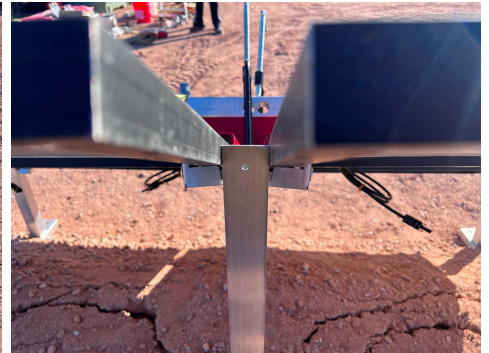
IR-F2 Clamp bracket after completion of testing
